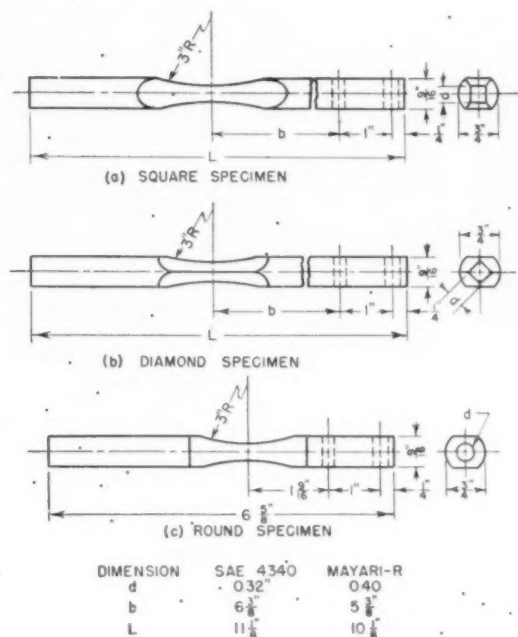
SPECIMEN FOR CANTILEVER BENDING MACHINE
